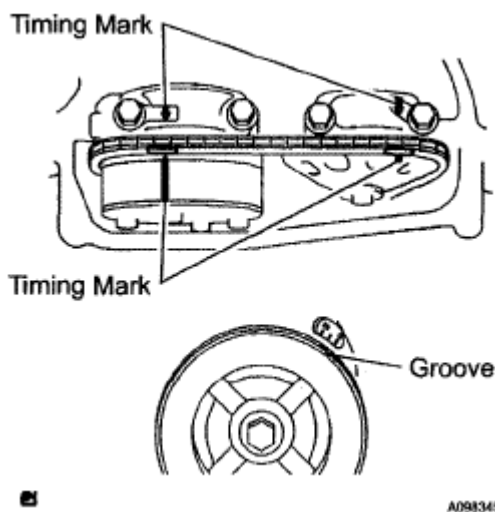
Checking Timing Mark Of Camshaft Timing Gears
